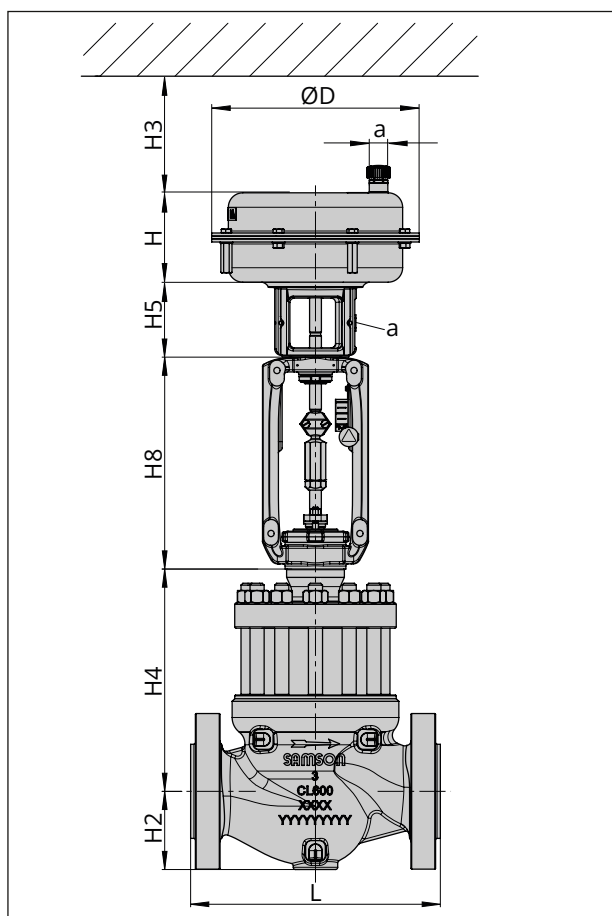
SMS HG-7 Control Valve: Type 261GR Valve with Type 3277 Pneumatic Actuator
